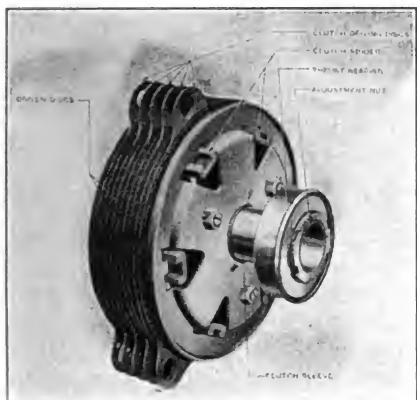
DISC ASSEMBLY OF CHALMERS MULTIPLE PLATE CLUTCH
